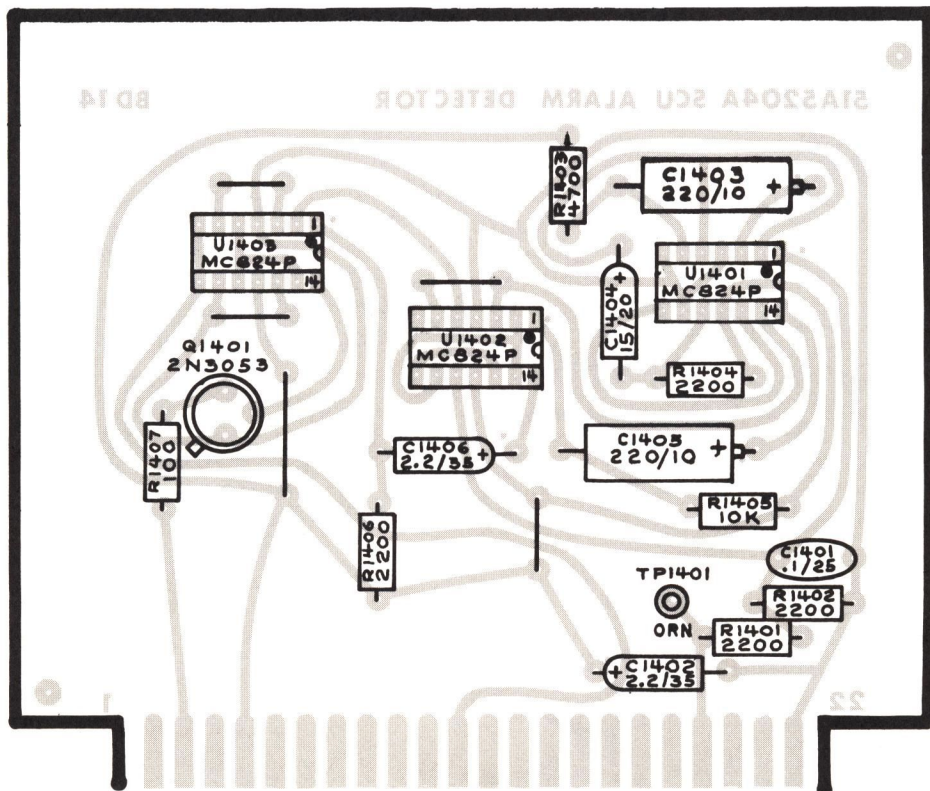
SCU Alarm Detector (Board 14), Parts Location
